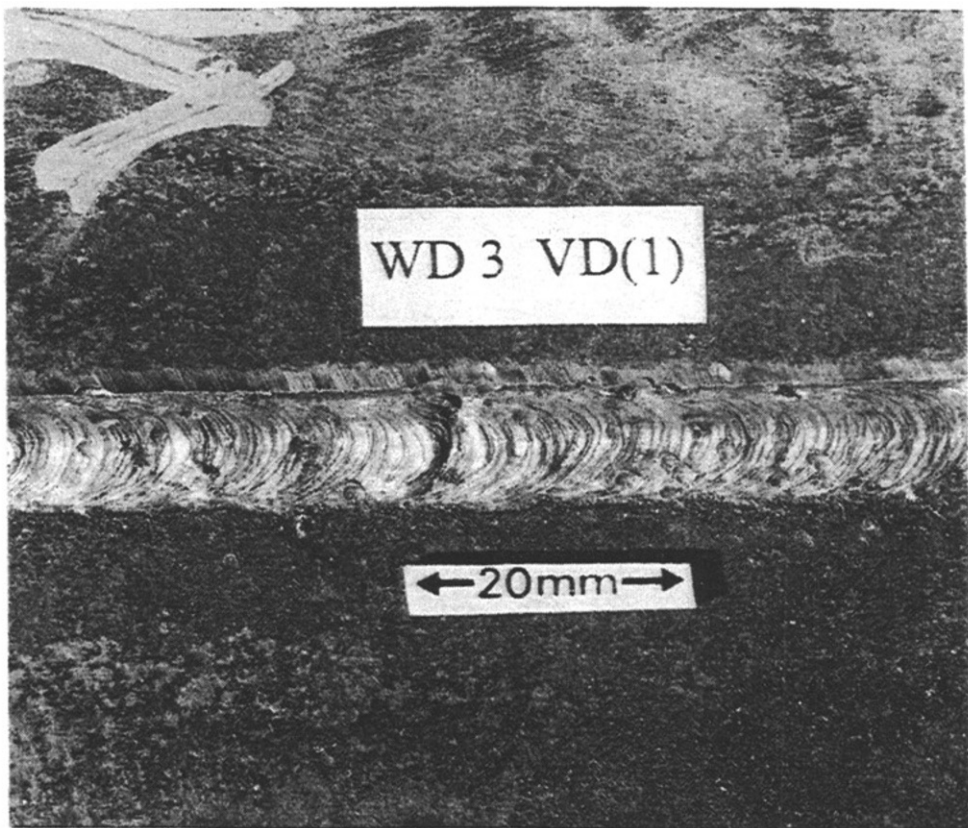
FCA wet weld in 8mm thick, C Mn steel plate welded in the vertical down position
